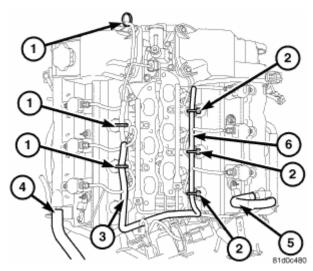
Identifying 2.7L Engine Wiring Harness Courtesy of CHRYSLER LLC
